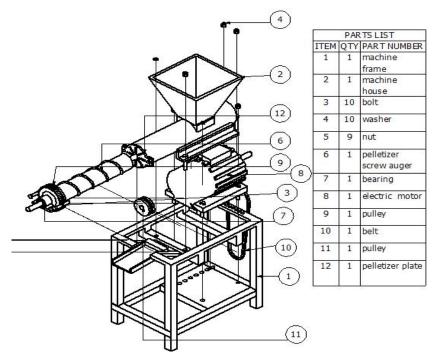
Exploded view Drawing of Fish Feed Palletizing Machine
